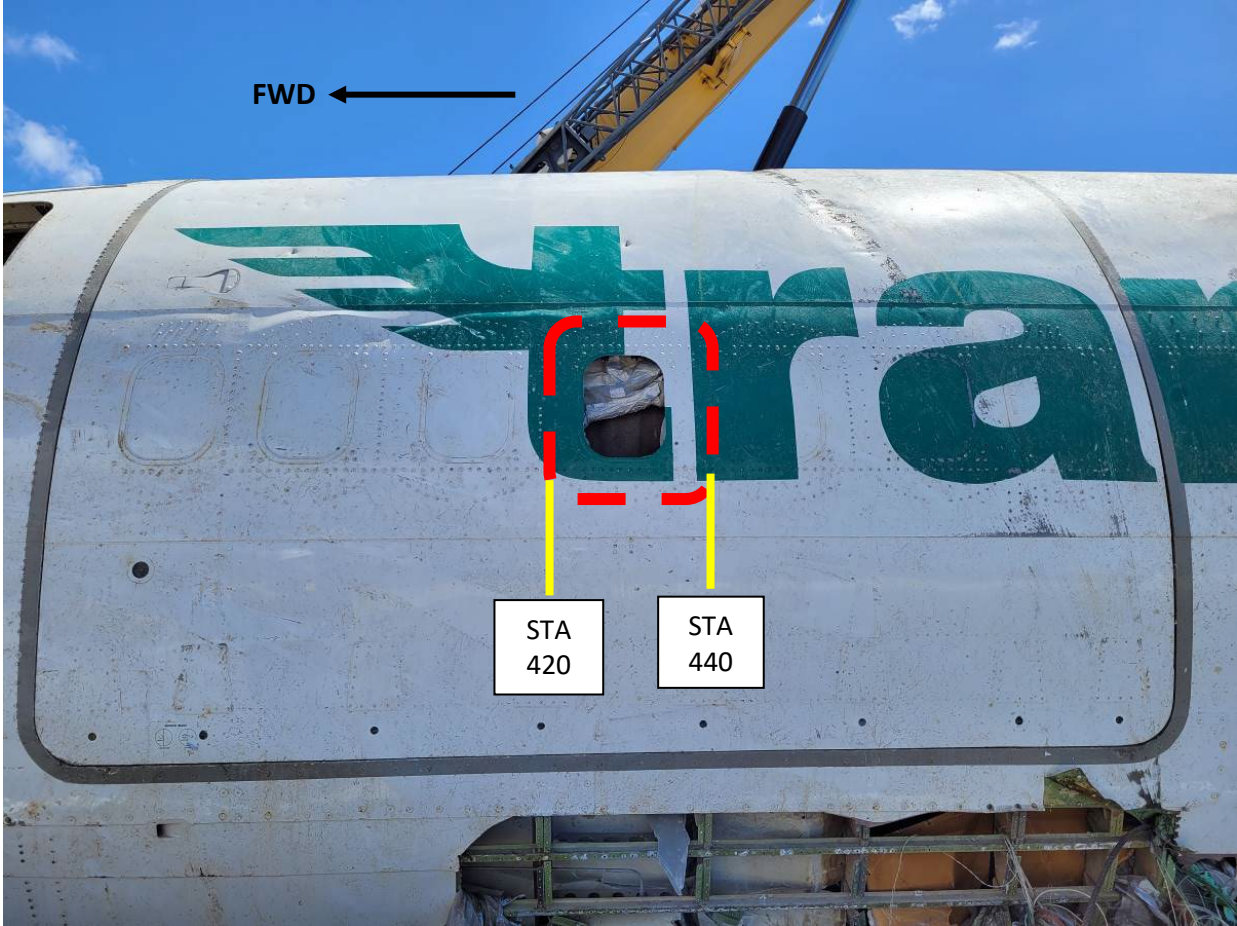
Missing window plug on left fuselage between STA 420 and STA 440 frames (Boeing photo)
